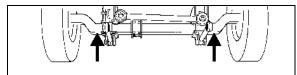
JACKING POINTS ON I-BEAM FRONT AXLE
